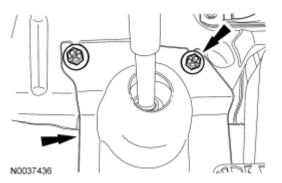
Locating Steering Joint Cover And Nuts Courtesy of FORD MOTOR CO.
